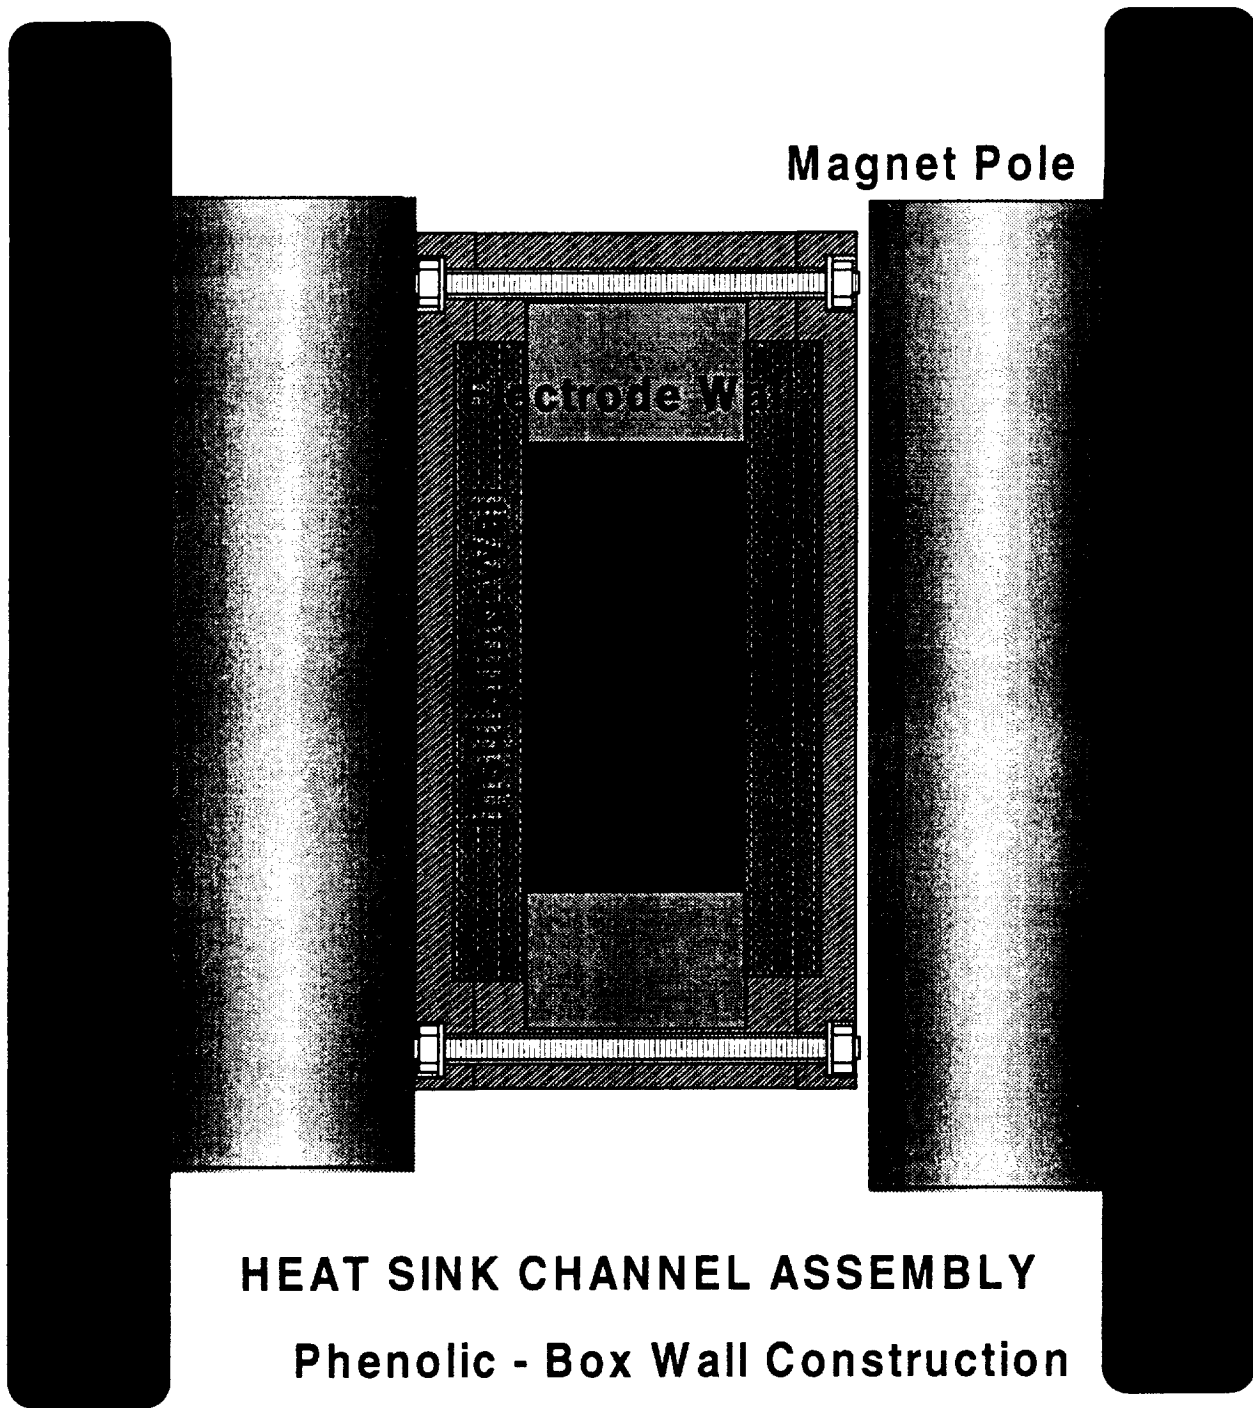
Conceptual Design of Heat Sink Faraday Channel Assembly
